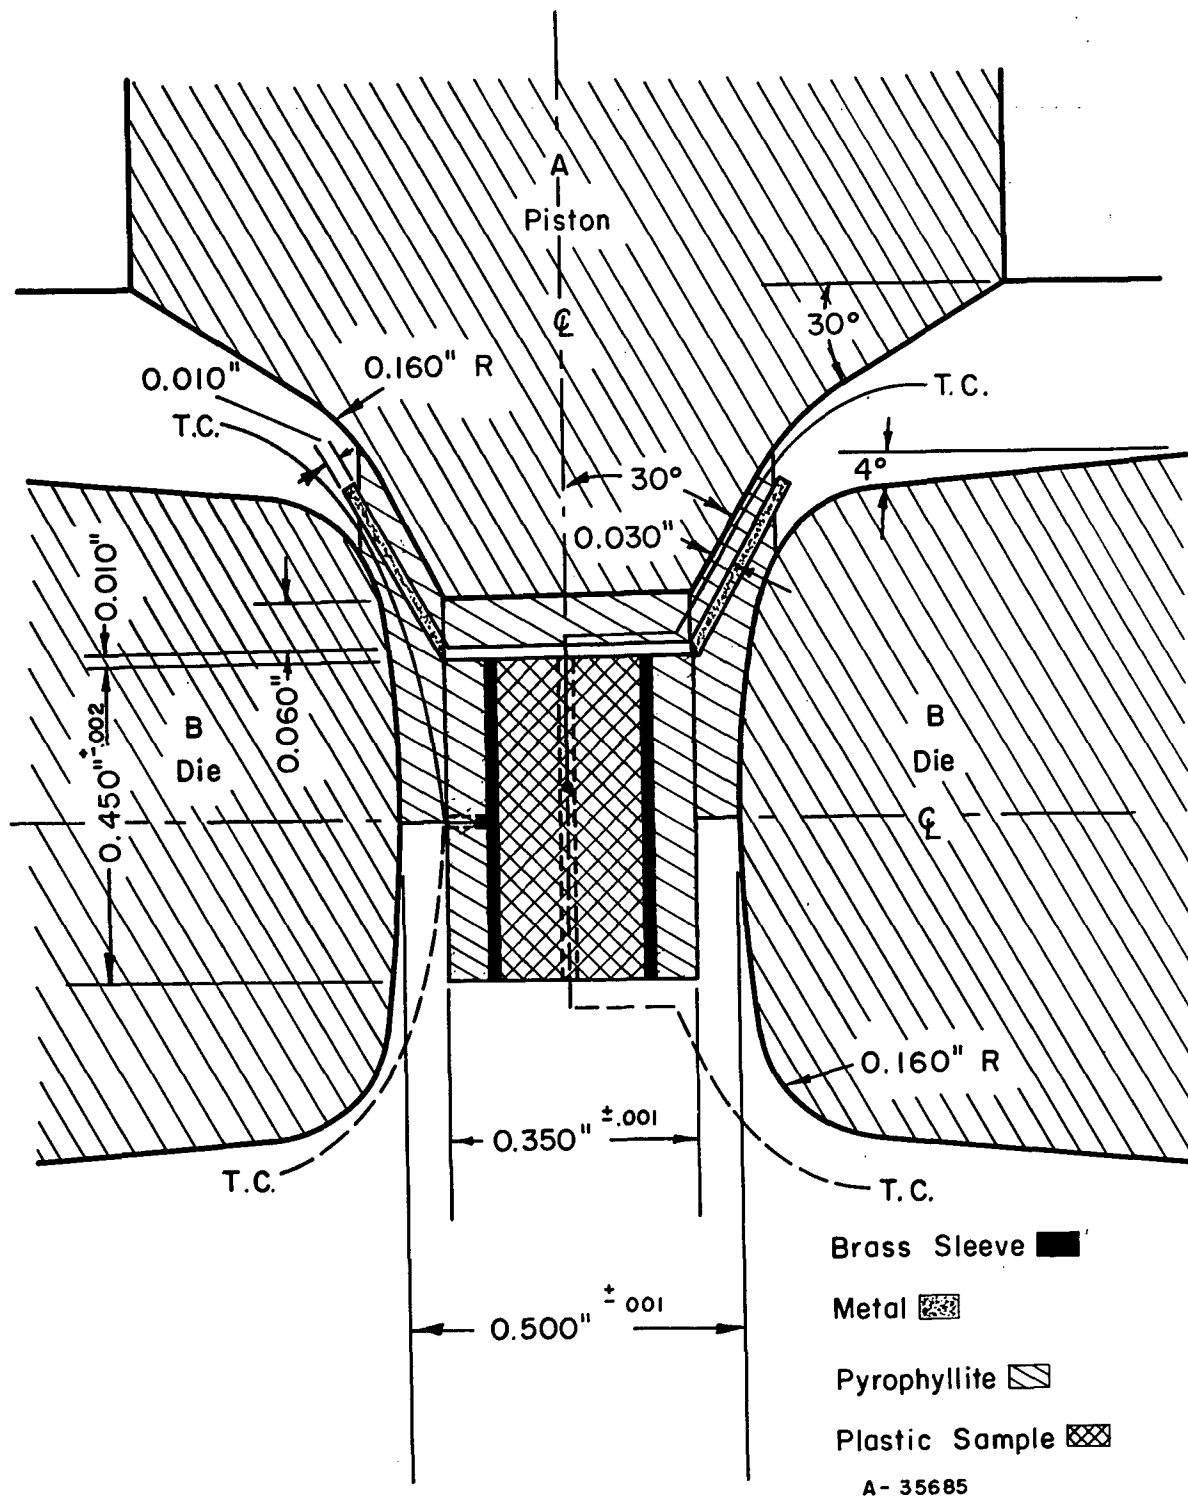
ULTRAHIGH-PRESSURE GASKET AND SAMPLE ASSEMBLY SHOWING THERMOCOUPLE PLACEMENT
